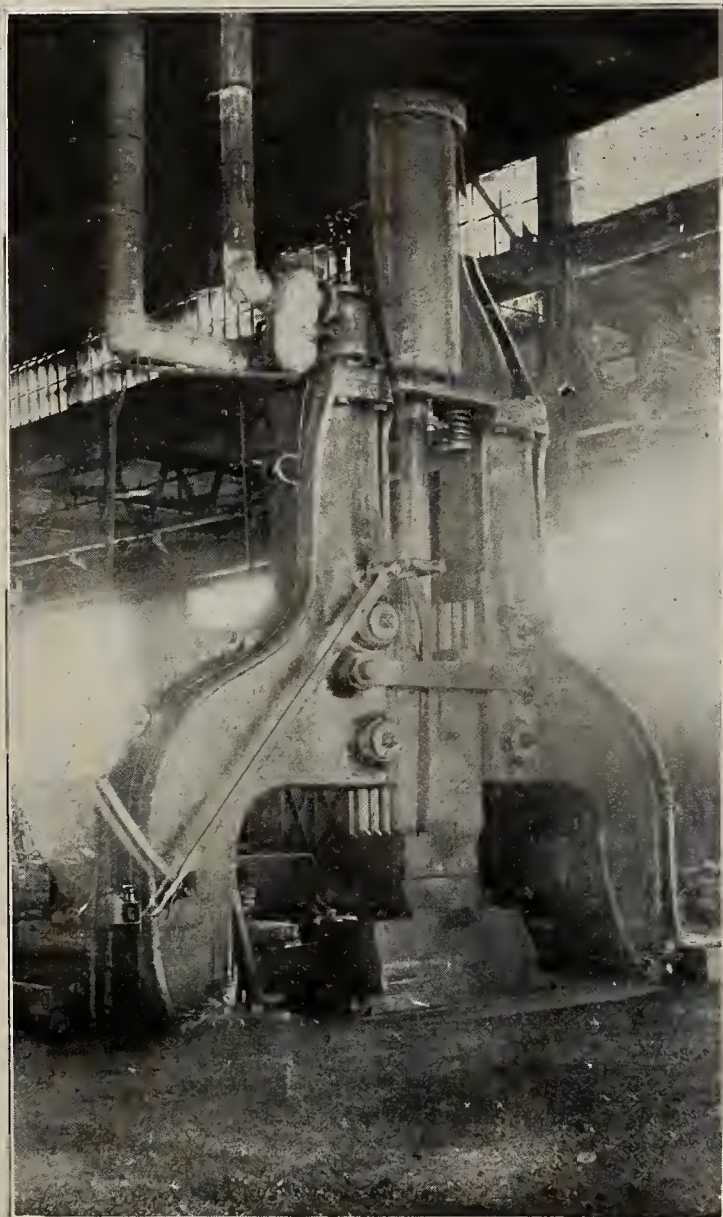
STEAM HAMMER IN SMITH SHOP C. P. R. SHOPS.
